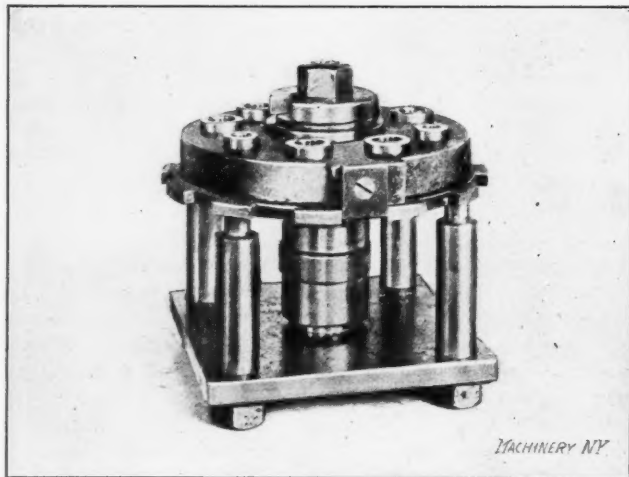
Jig for Drilling the Bolt and Pivot Holes in the Gear Case Covers. Another Jig for the Same Operation is shown at the Left of Fig. 5
